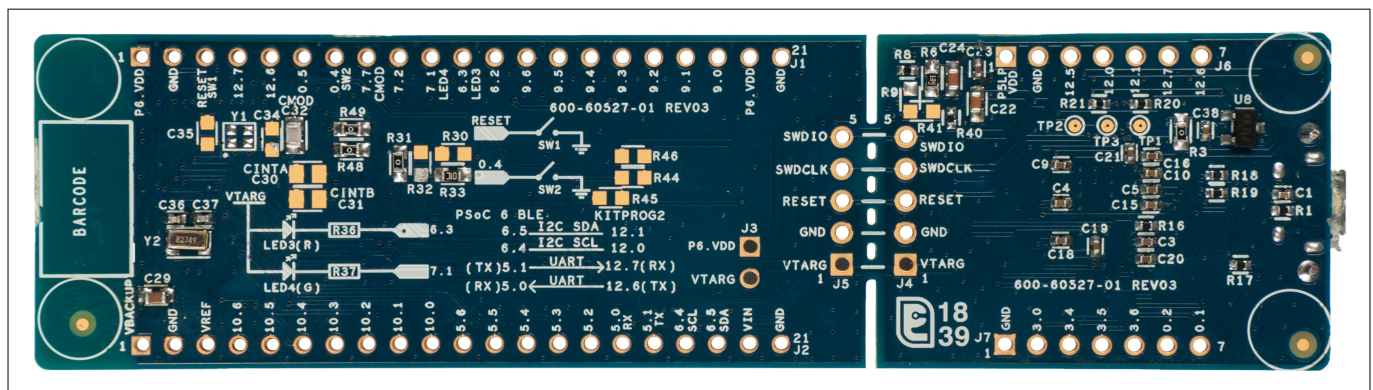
CY8CPROTO-063-BLE PSoC™ 6 Prototyping Board - Bottom view
